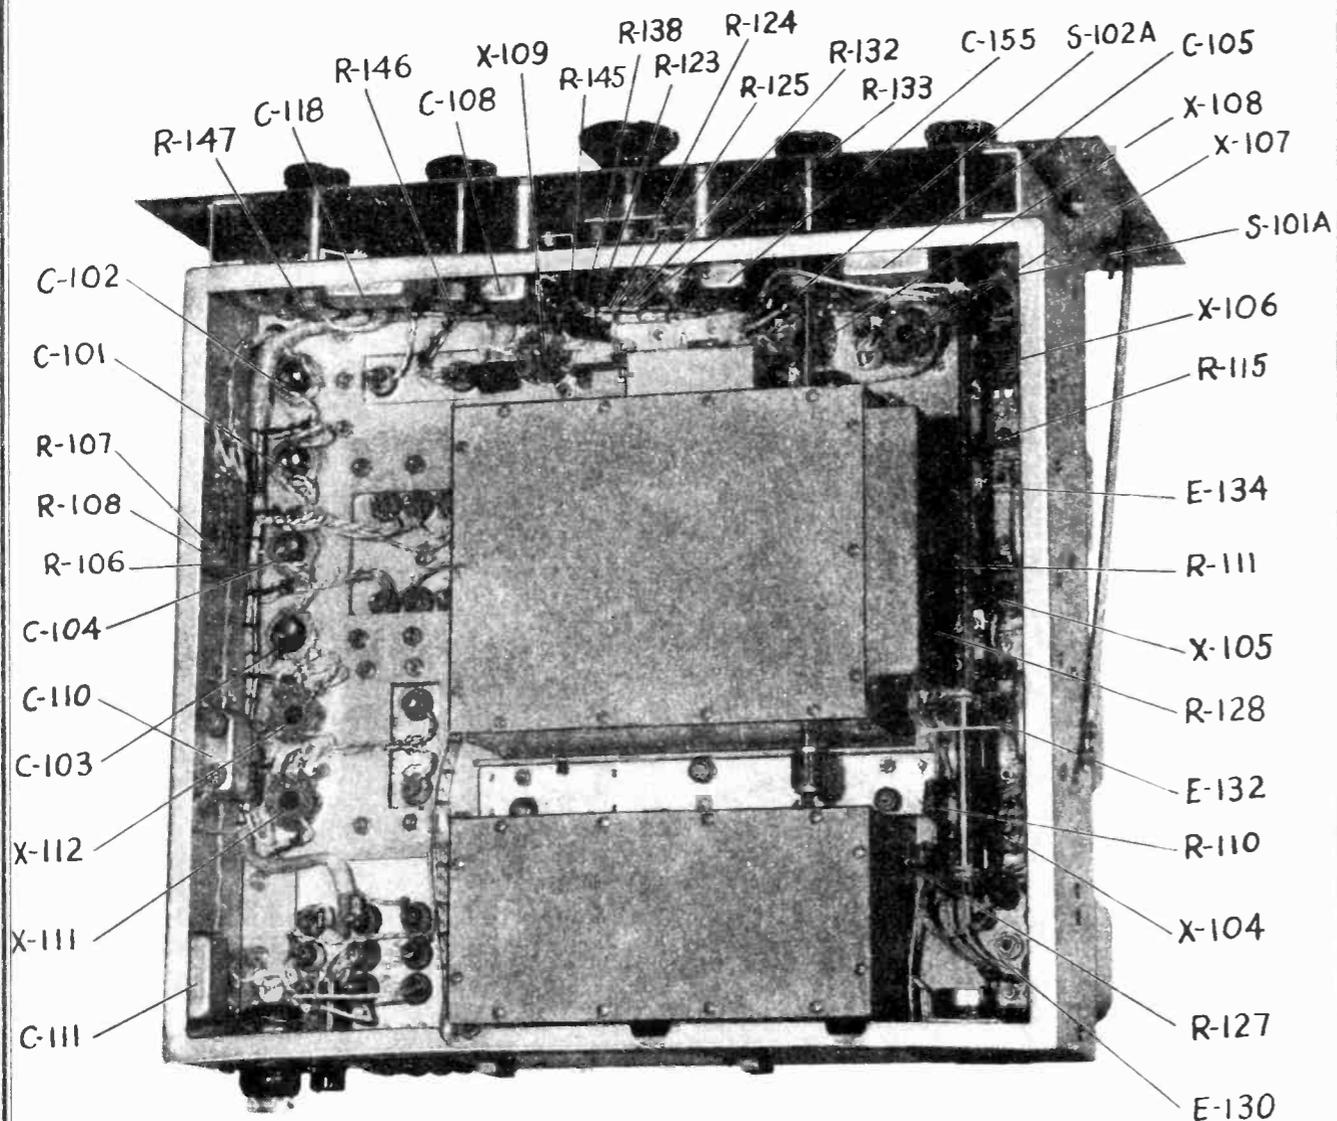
RIGHT BOTTOM OBLIQUE VIEW, RADIO RECEIVER CHASSIS. BOTTOM COVER PLATE REMOVED.
